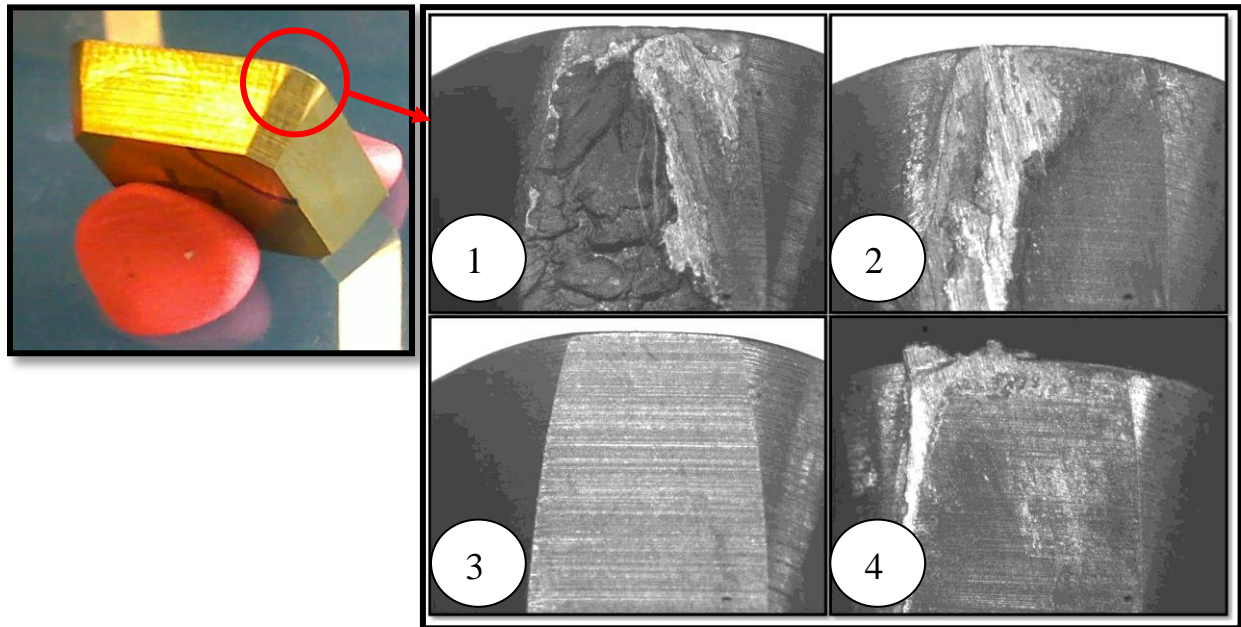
Flank face of the inserts used for the dry milling (Magnification 2X)
